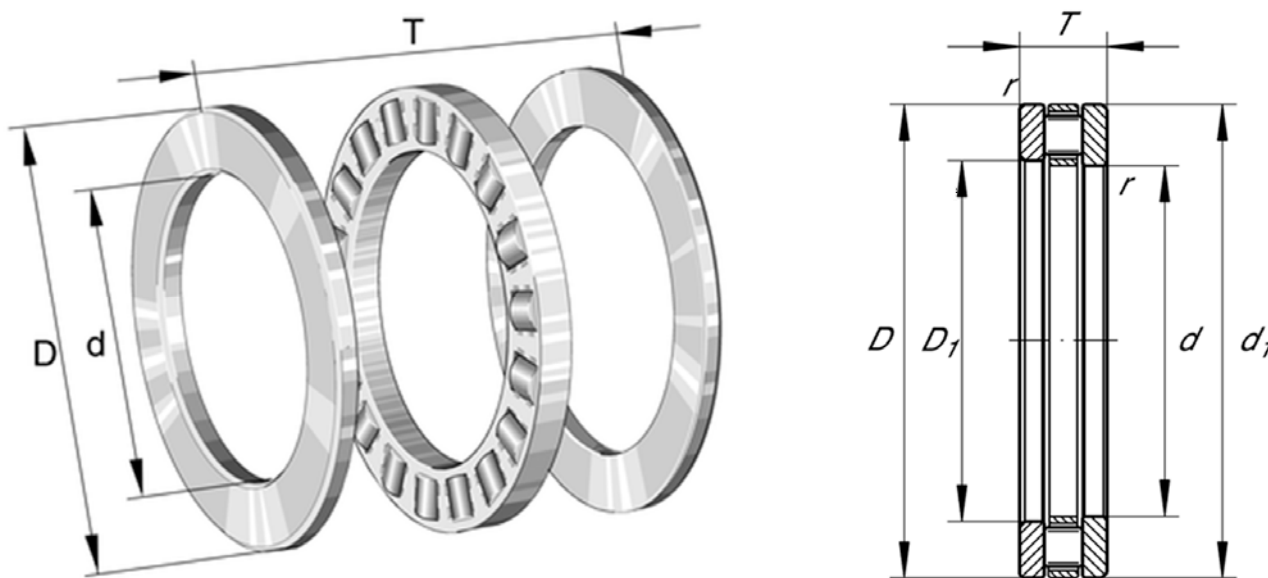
Illustrations of the 81212 bearing components and their dimensions [mm]: T (height) 26, d (bore diameter) 60, $D = d_1$ (outer diameter) 95, D_1 (bore diameter housing washer) 62, roller length = roller diameter 11 [36]. Please note that the actual bearing used for the tests has a cage containing 15 rolling elements.
